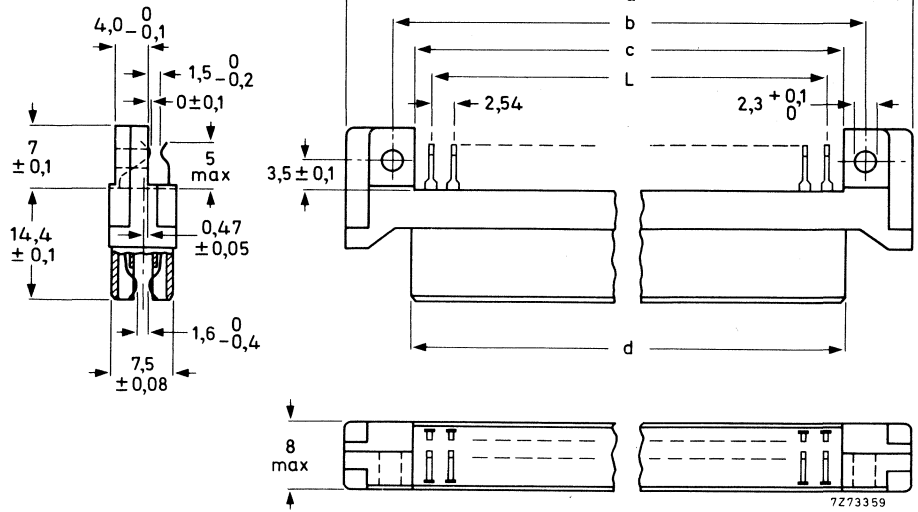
Board part with solder pins. See Table 1 for dimensions a, b, c, d
